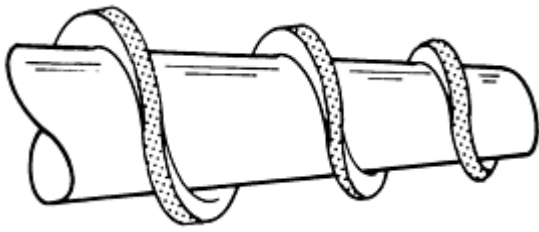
Abrasive wear on the flight surfaces of a helical screw used in spiral conveyor applications
